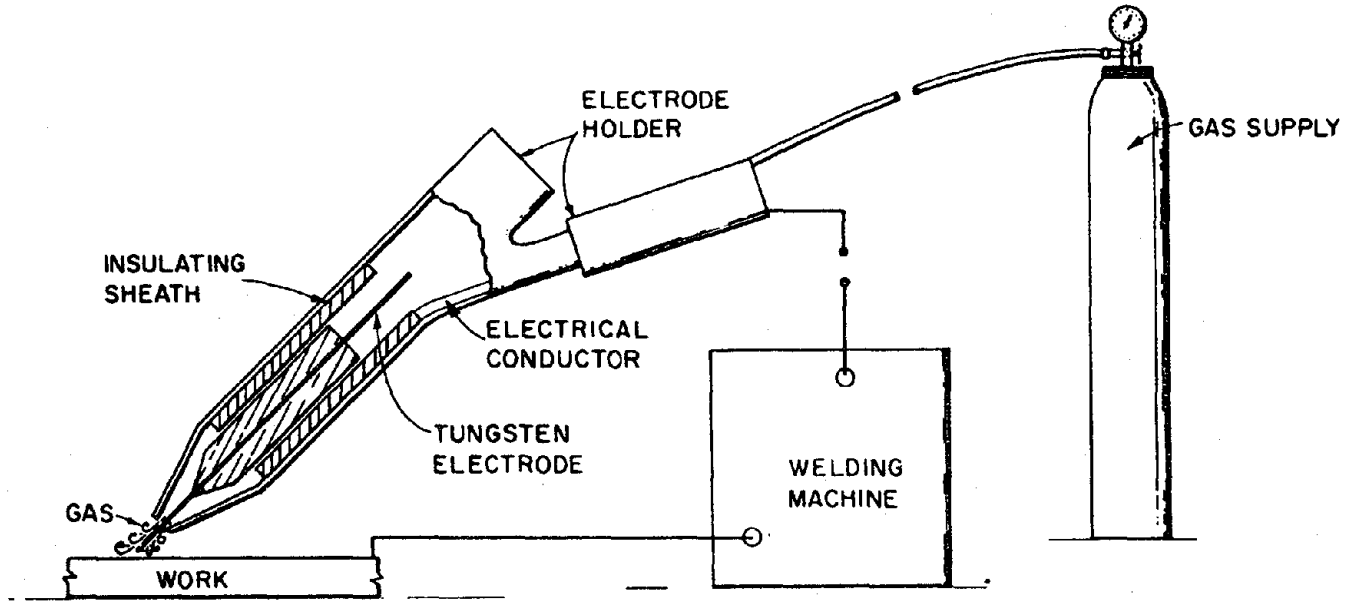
Heliarc Welding Process (Ref. 25)
